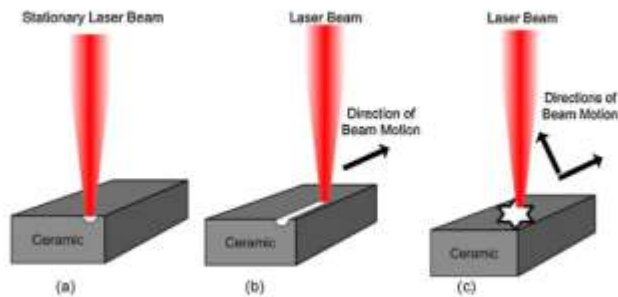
Schematic of basic laser machining processes (a) laser drilling (one-dimensional machining), (b) laser cutting (two-dimensional machining), (c) engraving a star by laser beam (three-dimensional machining).
